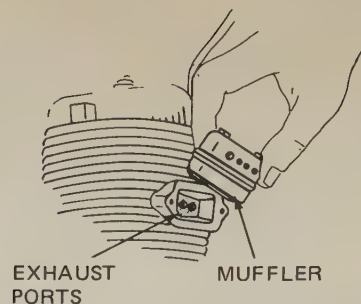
Removal of muffler to inspect exhaust ports of a two-cycle engine.
